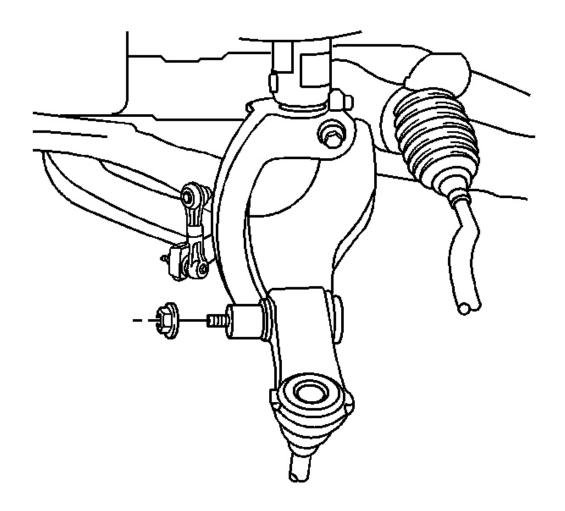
Removing/Installing Shock Module Yoke Lower Mounting Nut Courtesy of GENERAL MOTORS CORP.
